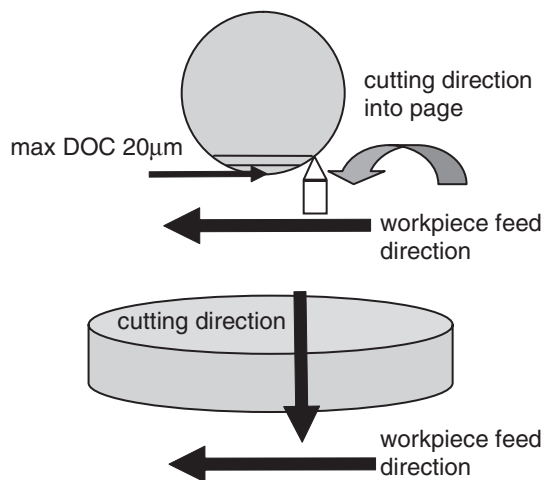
Schematic diagram of the cutting direction and tool-workpiece relation
